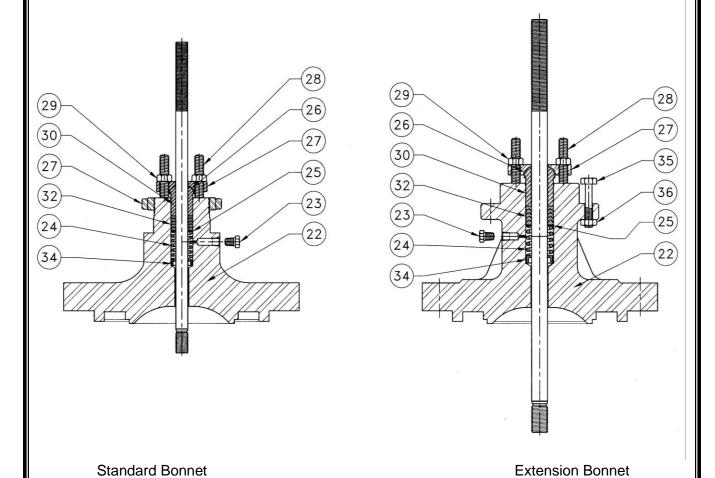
Bonnet Assemblies, CVS Series E 8" Globe Valves,
